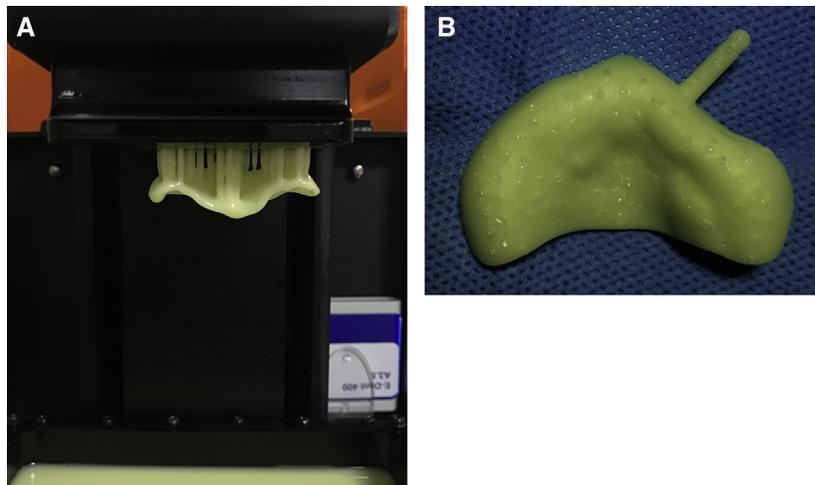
Stereolithographic printing of molding plate. A, Printed molding plate on the platform printer. B, After trimming, removal of supports, and autoclave sterilization.
